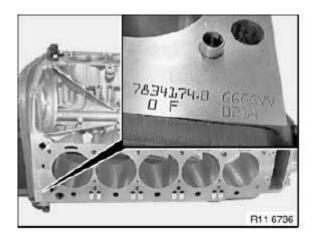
Identifying Color Allocation On Crankshaft (Crankcase Bearing Block) Courtesy of BMW OF NORTH AMERICA, INC.
